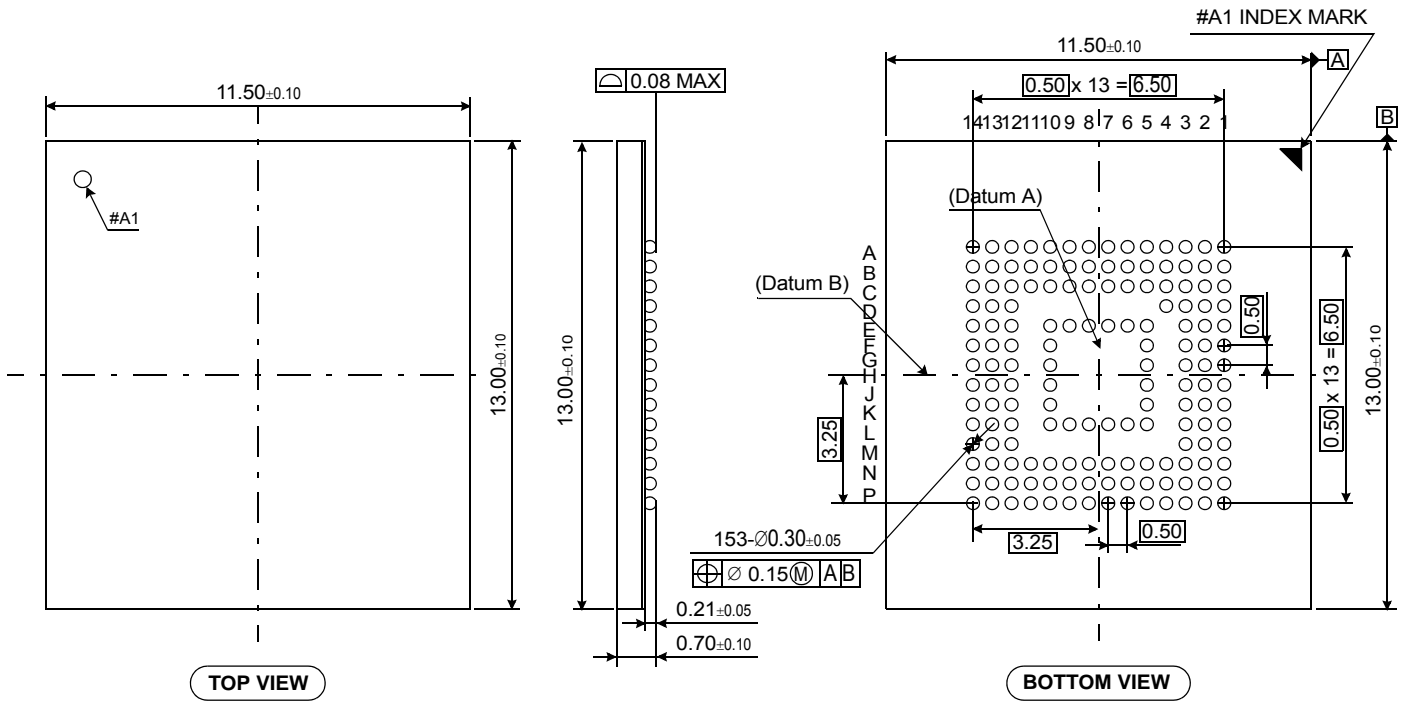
11.5mm x 13mm x 0.8mm Package Dimension
